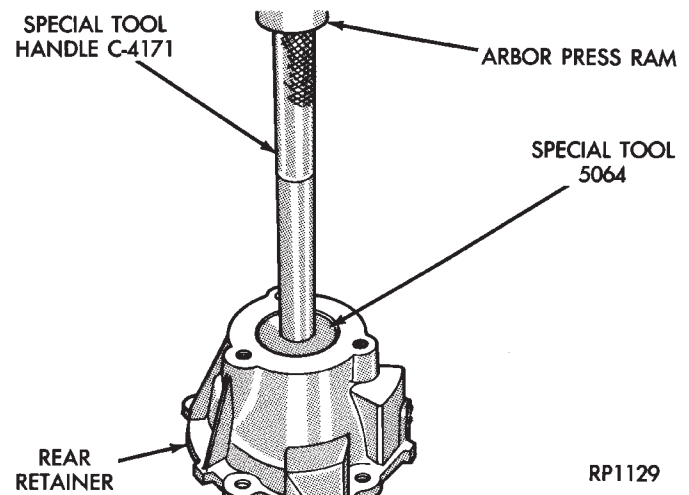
Installing Mainshaft Rear Bearing In Rear Retainer
